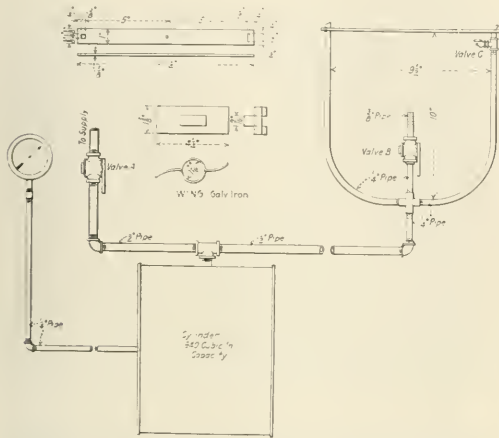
Device for Grinding and Testing Retaining Valves in One Operation
